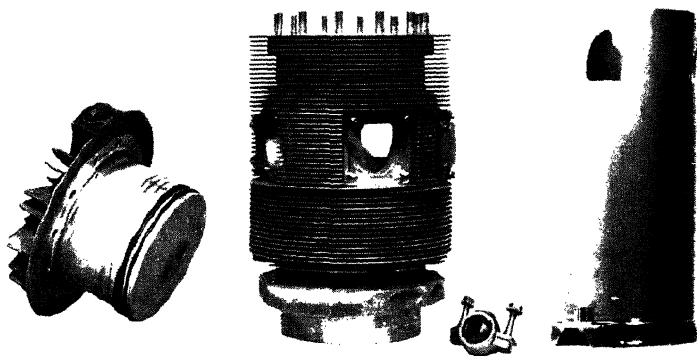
The cylinder head, cylinder, spherical joint member and sleeve of Bristol sleeve valve engine.
